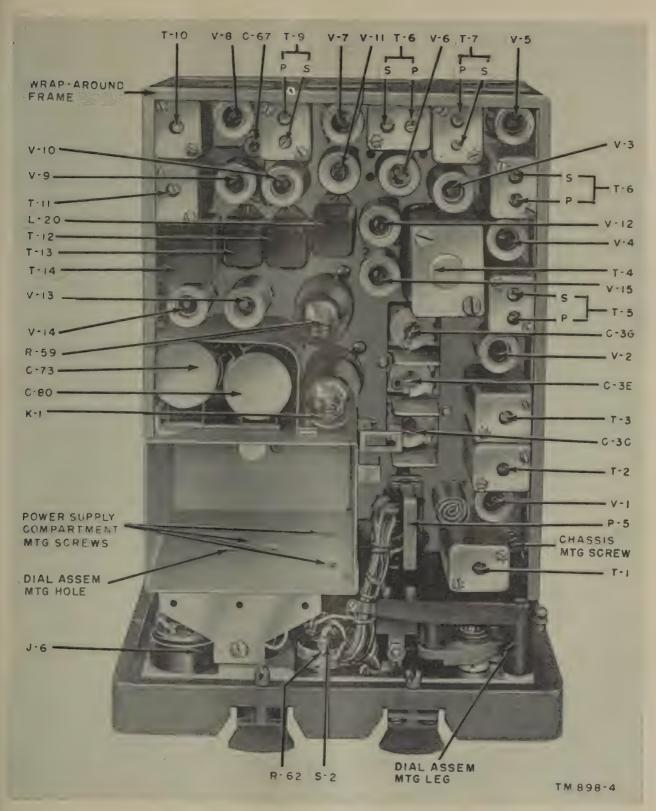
Auxiliary receiver panel-chassis assembly, top view.
